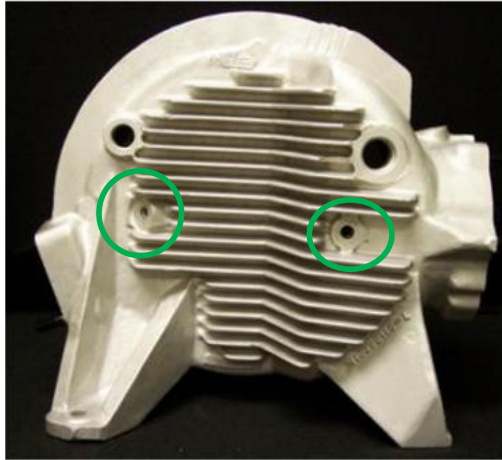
Tail rotor gearbox housing; profile contains two inserts (green).
